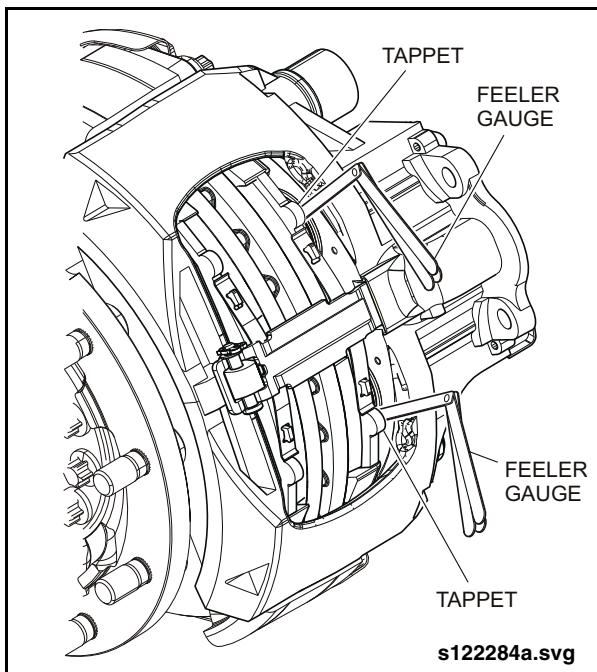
Measuring Tappet to Brake Pad Gap
